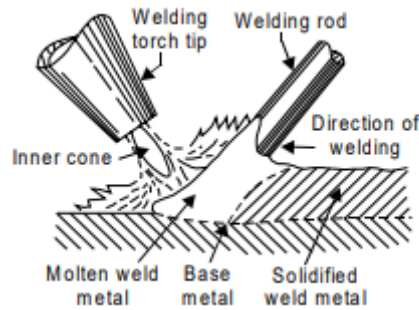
Shows Gas Welding Process(wordpress.com)
